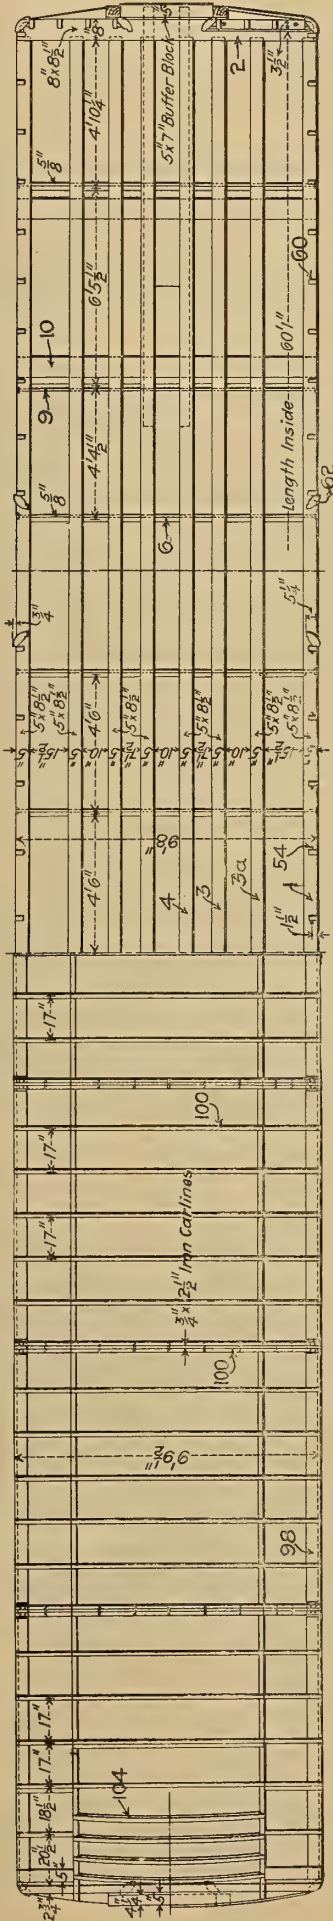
SIDE VIEW, SHOWING TRUSS AND ROOF FRAMING.
